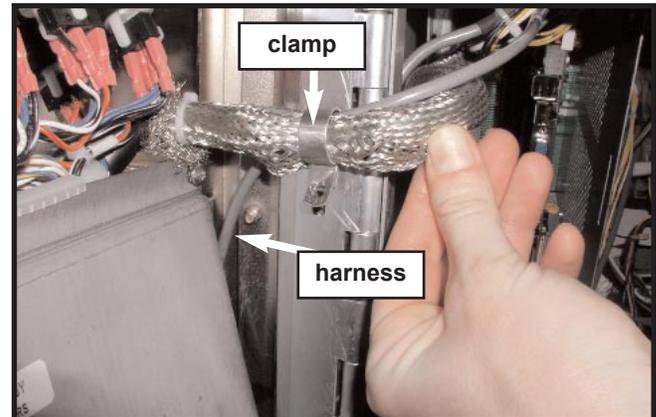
Routing the Belly Door switch harness through the door hinge cable clamp.
